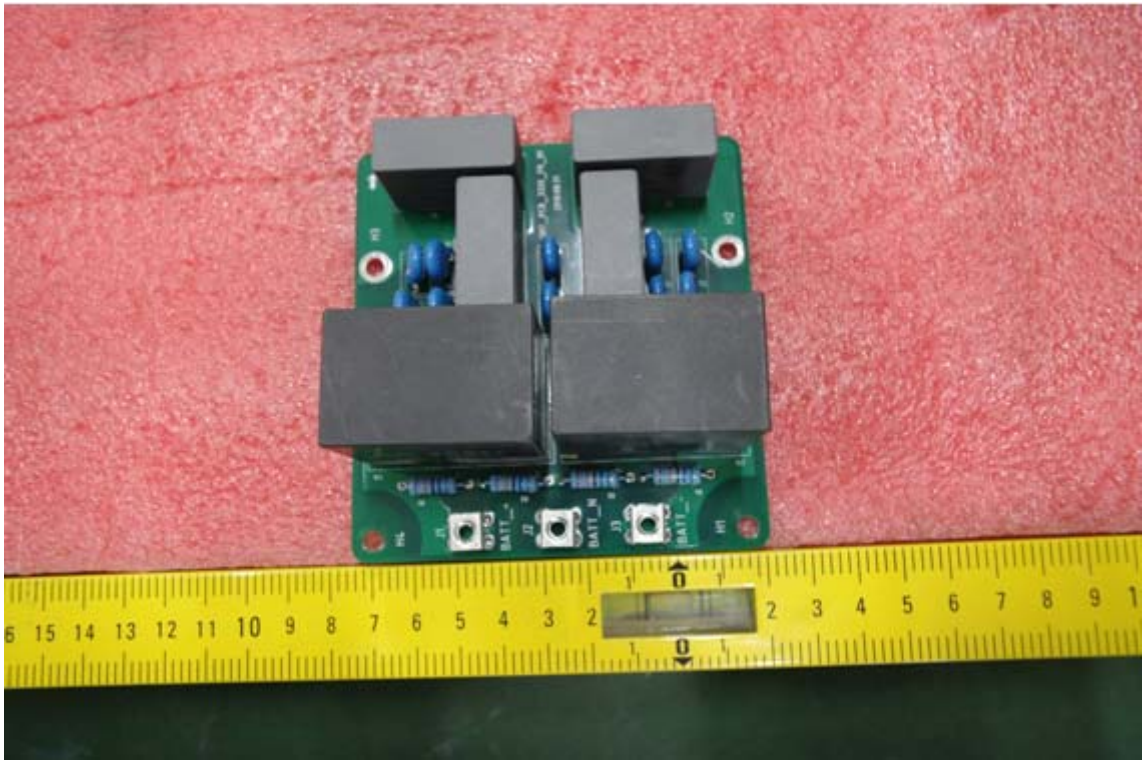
Board SNT\_3320\_PCB\_FR, components side view
